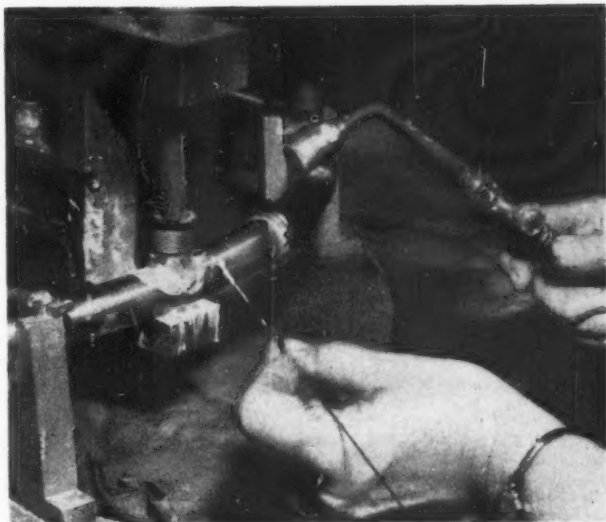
A Fixture with an Arm in the Form of a C-clamp secures the Outlet to the Ring for the Silver-soldering Operation
